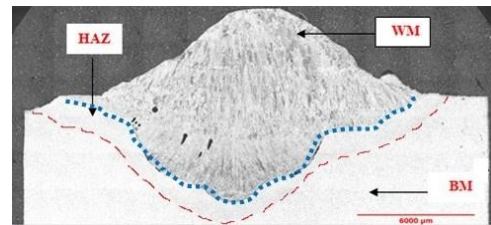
Figure XII. Macrograph for the bead on plate weld show different zones
